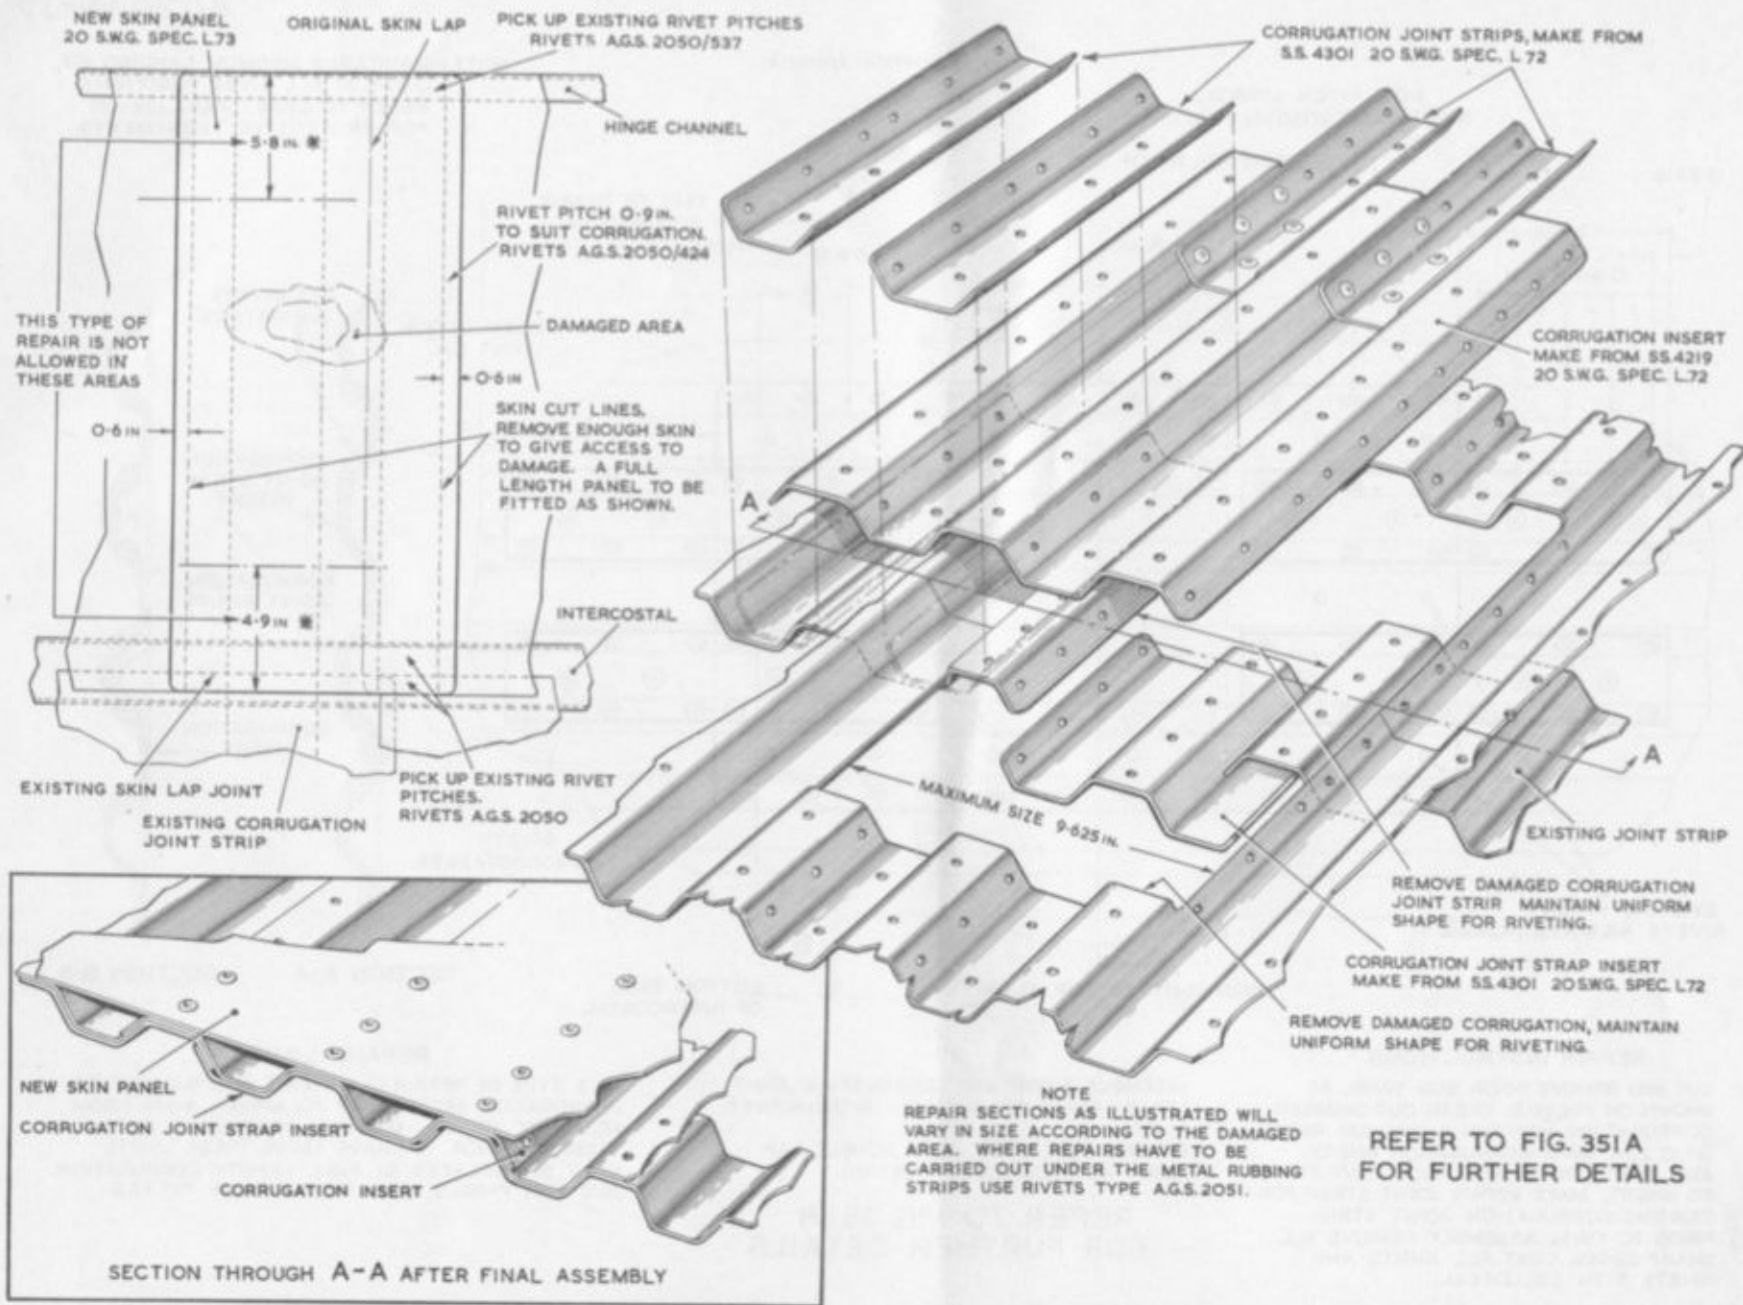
B BOMB DOOR REPAIR CORRUGATION JOINT AND SINGLE SKIN
